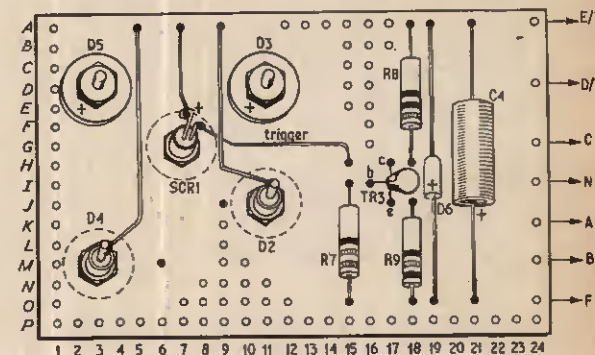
Layout and wiring of the switching and trigger Veroboard panel
